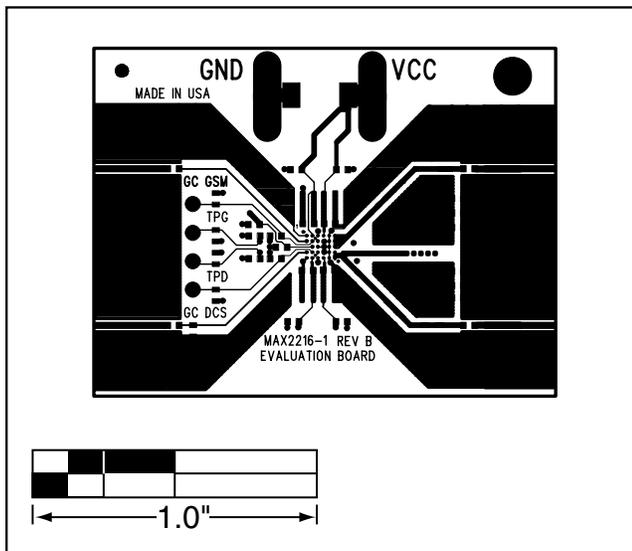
MAX2216 EV Kit PC Board Layout—Component Side
